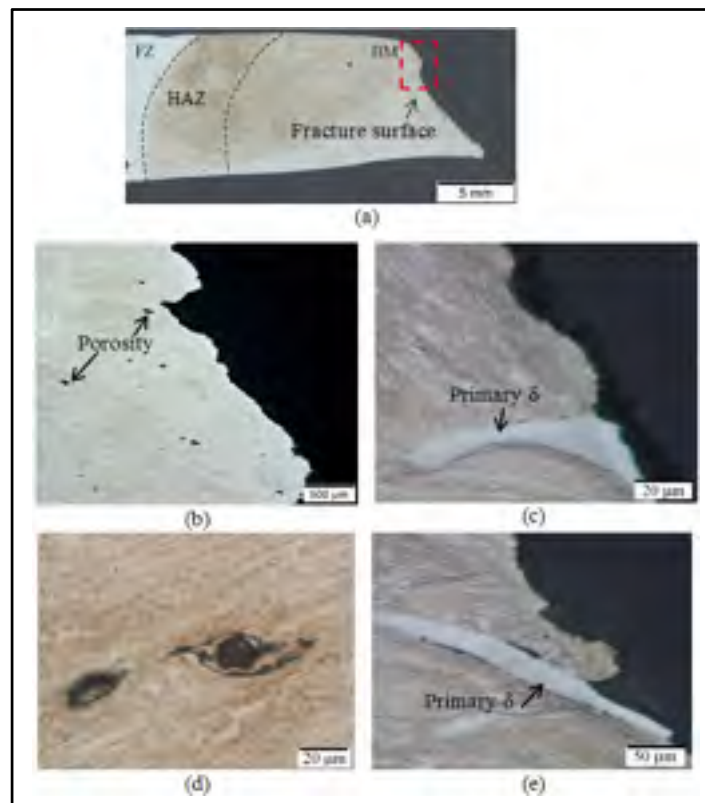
Microstructure near the tensile fracture surface of the weld assembled at a welding speed of 1.0 m/min with failure occurring exclusively in the BM
